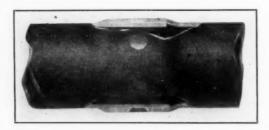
DETAIL OF STRAIGHT LINE WELD
